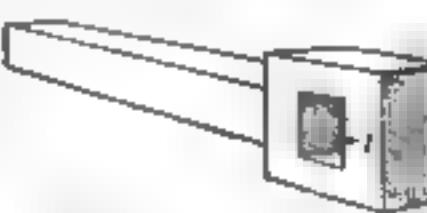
Former, to be held in tool post of lathe when drill is running and work is on back center
